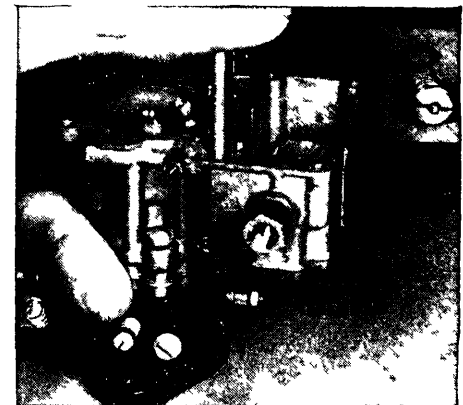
Assemble power by-pass jet and gasket. In the power by-pass jet the stem extends above the top of the jet
